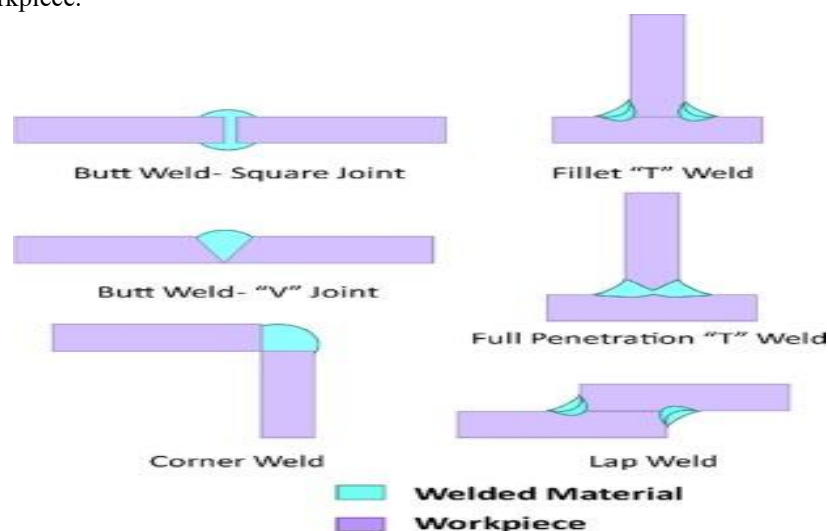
Welded Materials Workpiece (Corigliano and Crupi, 2022)
